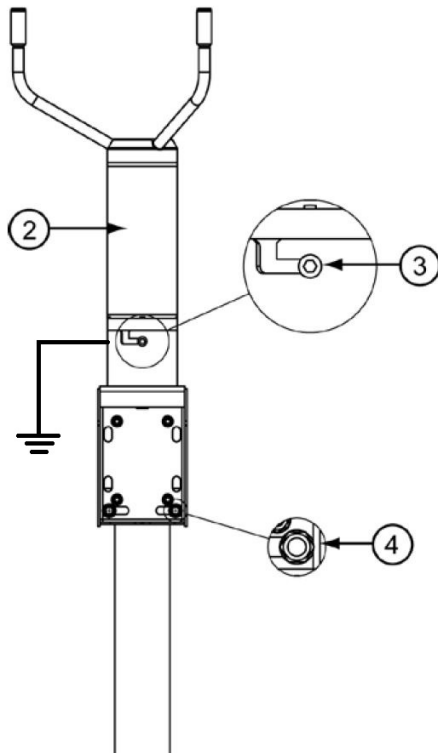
Mount the mast bracket on top of the mast. Mount the supplied screw in the lower part of the sensor (2) and place it in the mast bracket, turn it slightly until the mounting screw is in the end position (3), tighten the screw to lock the sensor in place. Mount the 2nd screw in the mounting bracket opposite to the first screw (3) and tighten it firmly to secure the sensor. Make sure that the sensor is correctly aligned.
